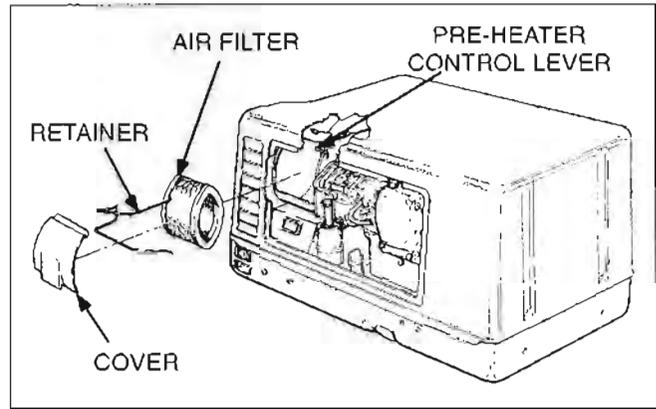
AIR FILTER AND PREHEATER ASSEMBLY (TYPICAL ALSO OF MODEL KVC)
